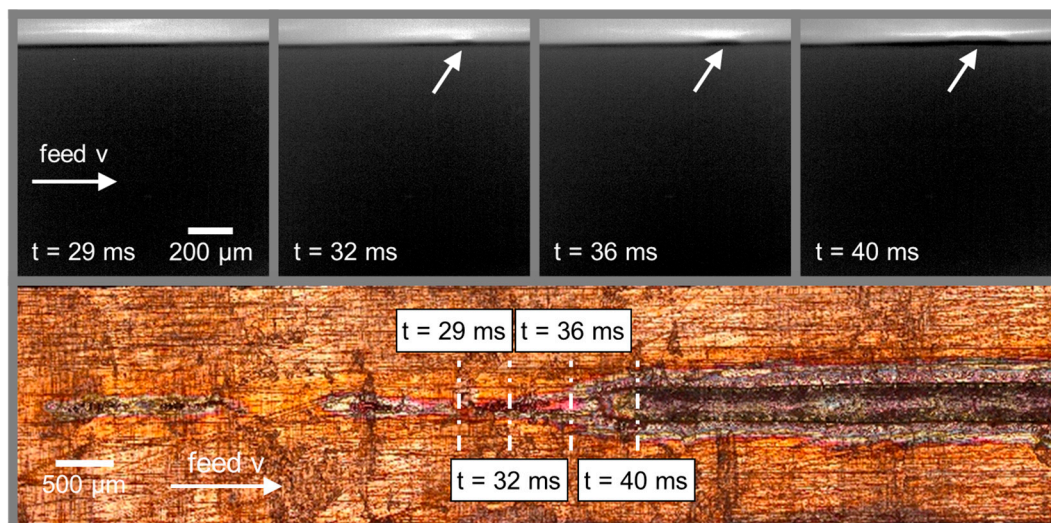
(Upper) X-ray video sequence of laser beam welding of copper using 1030 nm laser radiation, $P = 4000$ W, $v = 133.3$ mm/s, $d_F = 800\ \mu\text{m}$; (lower) corresponding top view of the weld seam.
